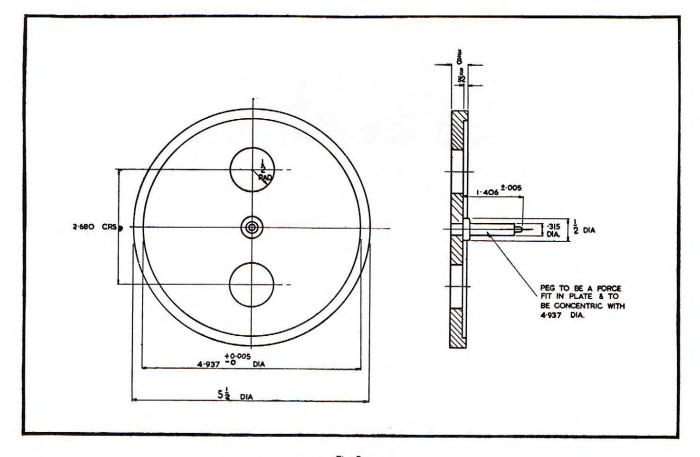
Plan view of centralising jig. (Measurements in inches).
